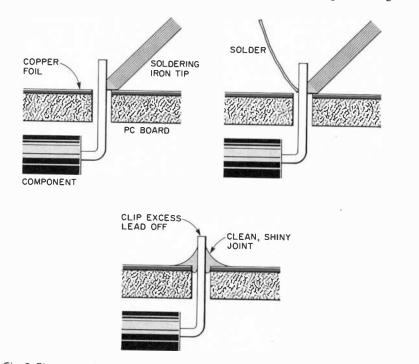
Steps in soldering. Place heated iron to junction of parts to be soldered (top left) Bring flux-cored solder to the joint after it is hot enough to melt solder (top right) When a smooth-contoured fillet has formed, remove the solder and allow to cool without moving. form the replaceable tip. Usually, soldering guns come with high wattages, in most cases too high for use with pc foil patterns. Such guns also generate a high magnetic field around the tip that can de-gauss any magnetically sensitive devices close to it. Using a gun may produce too high a heat on the foil pattern so that the cement that secures the copper foil pattern to the substrate is weakened and the foil separates from the printed circuit board.
